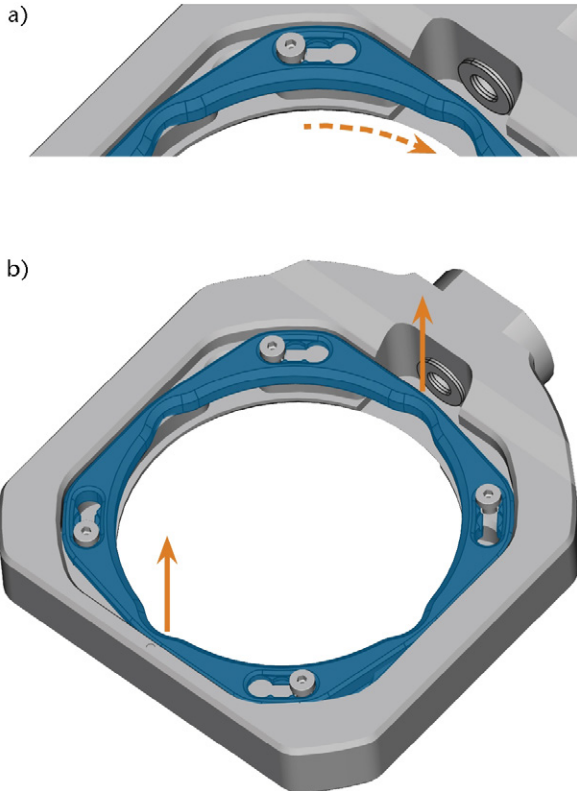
REMOVING THE FIXING RING FROM THE BLANK HOLDER
